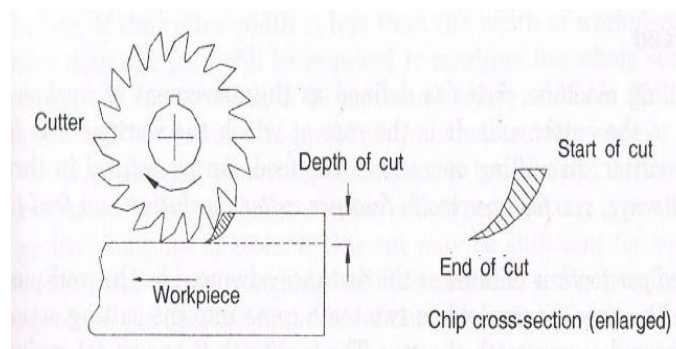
Down milling operation and the chip cut by a cutter tooth.
